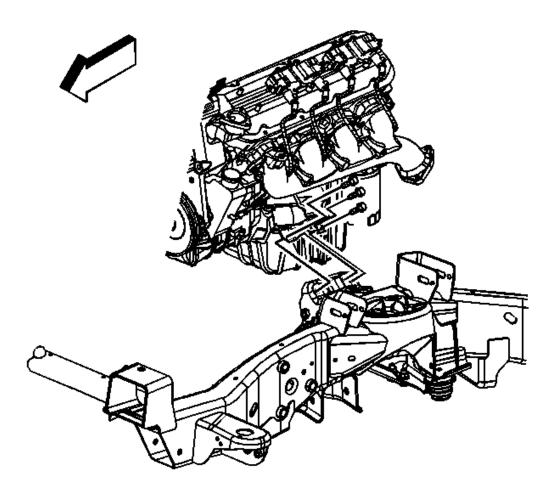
View Of Engine Mount Heat Shield Courtesy of GENERAL MOTORS CORP.
